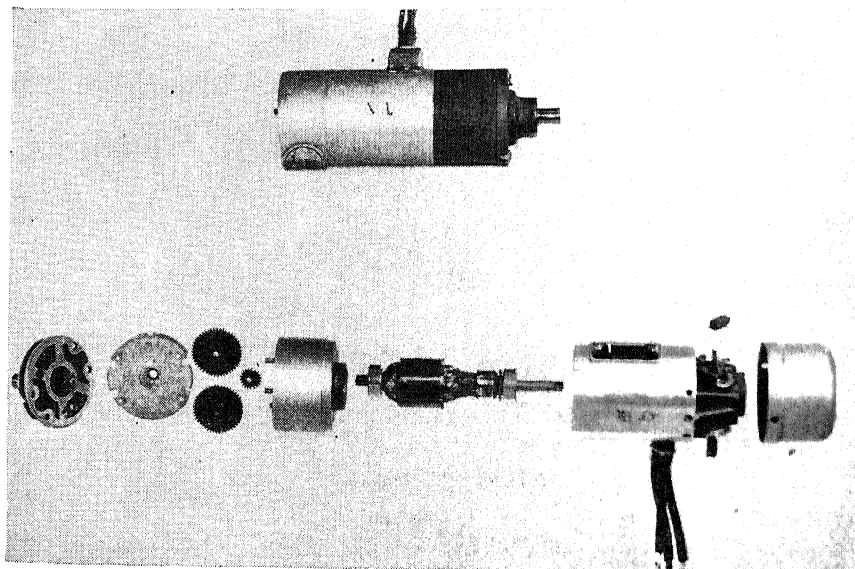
General Electric and Delco d-c aircraft motors with integral gear boxes: 27-volt input, split-field reversing.
